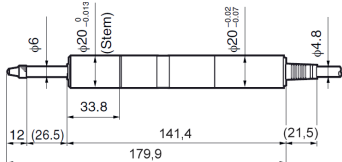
Dimensions Type 2122B10 and Type 2122B25
